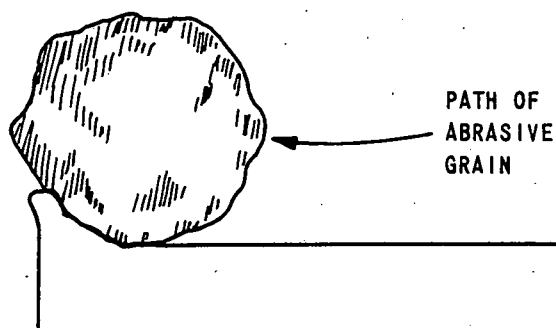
Formation of Roll-Over Burr as Grain Exits From Back Edge of Workpiece
